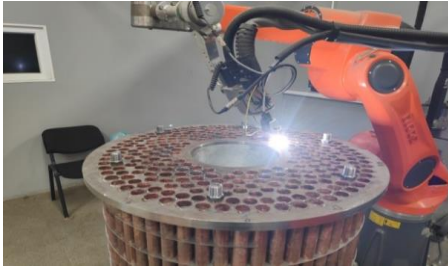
The pilot welding of a circular row of pipes to the tubular plate
